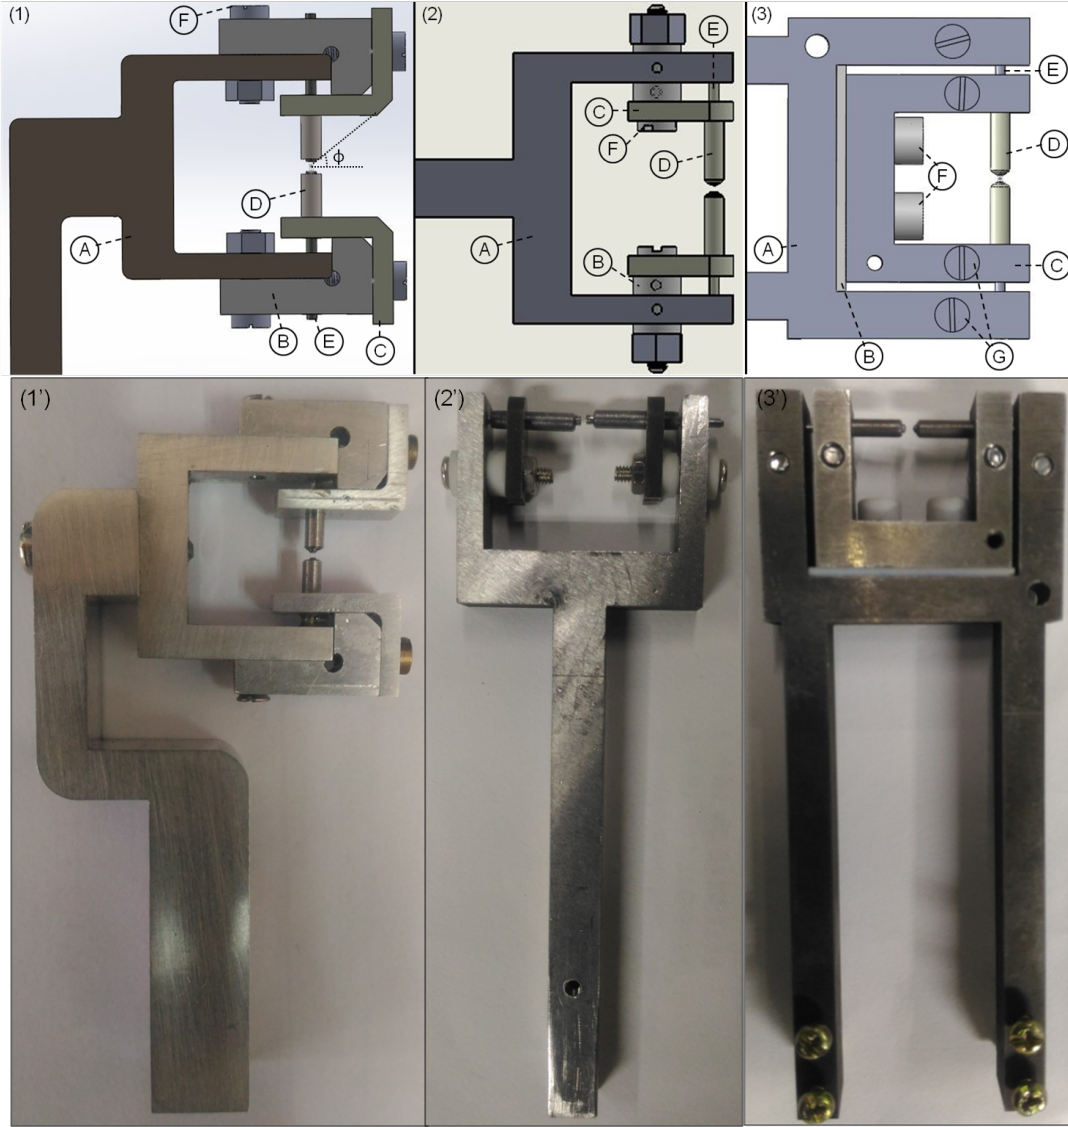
Different designs of the trap assembly (1), (2) and (3) with convention A: trap holder cum stand, B:insulating spacer, C:holder for outer electrodes, D:outer electrodes, E:inner electrodes, F:metallic screws and G:clamping screws. Machined prototypes of (1), (2) and (3) are shown in (1'), (2') and (3') respectively.
